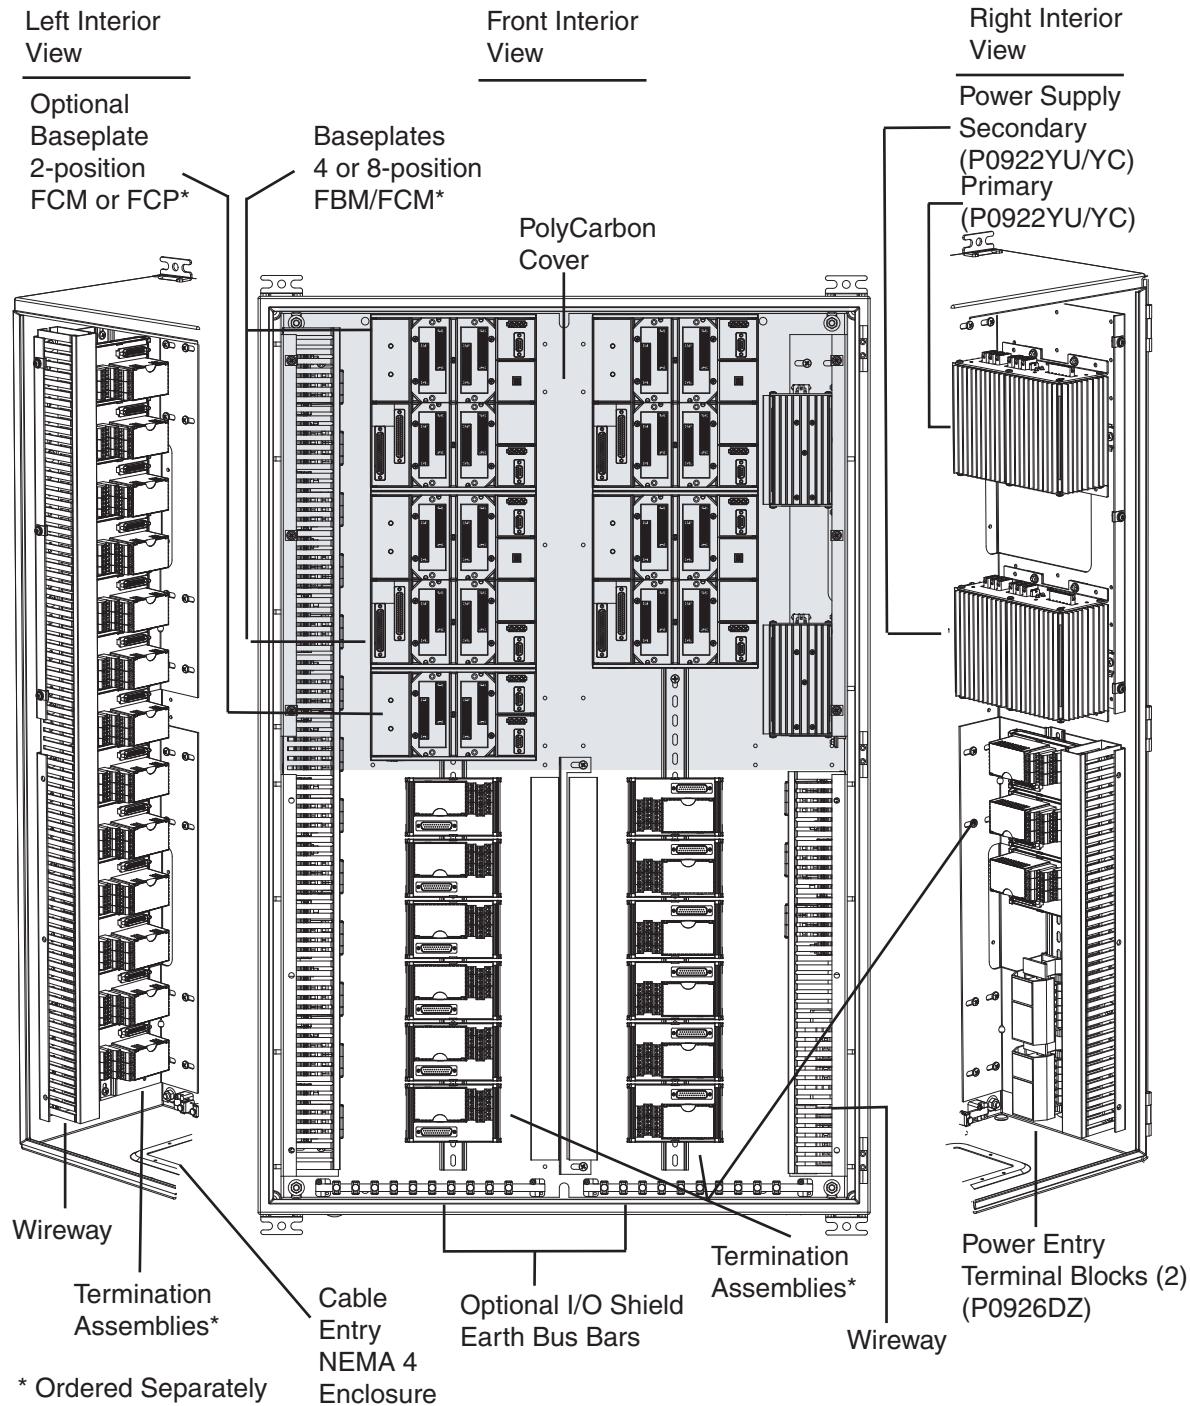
G06 Enclosure, Bottom Cable Entry, Front View
